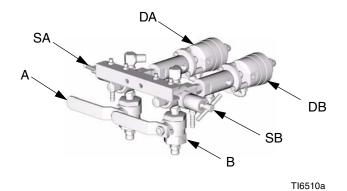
Dispense Valves, Sampling Valves, and Fluid Outlet Valves
